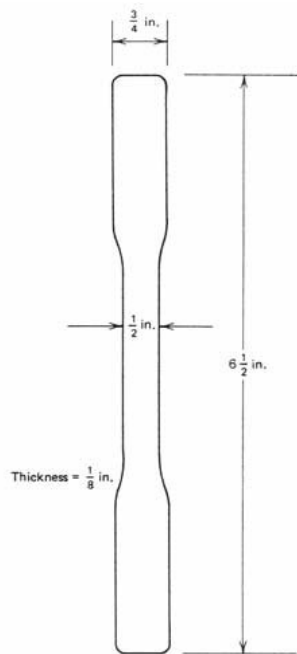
ASTM D638 Type I tensile test specimen [16]
